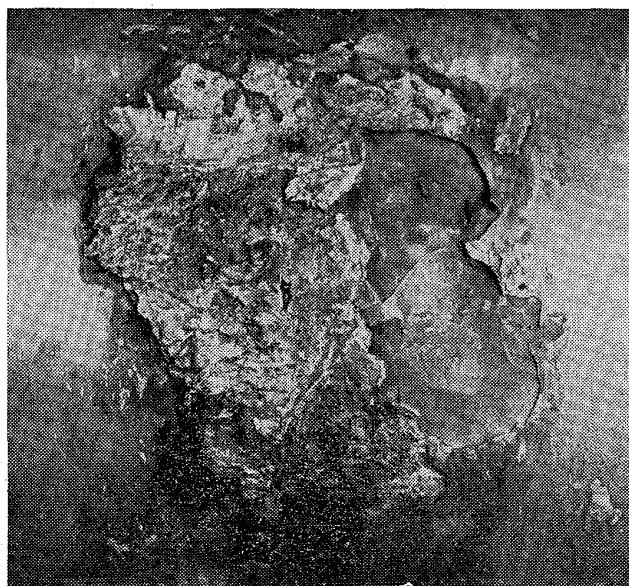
Welds on the roll surface and cracks in the roll body.
